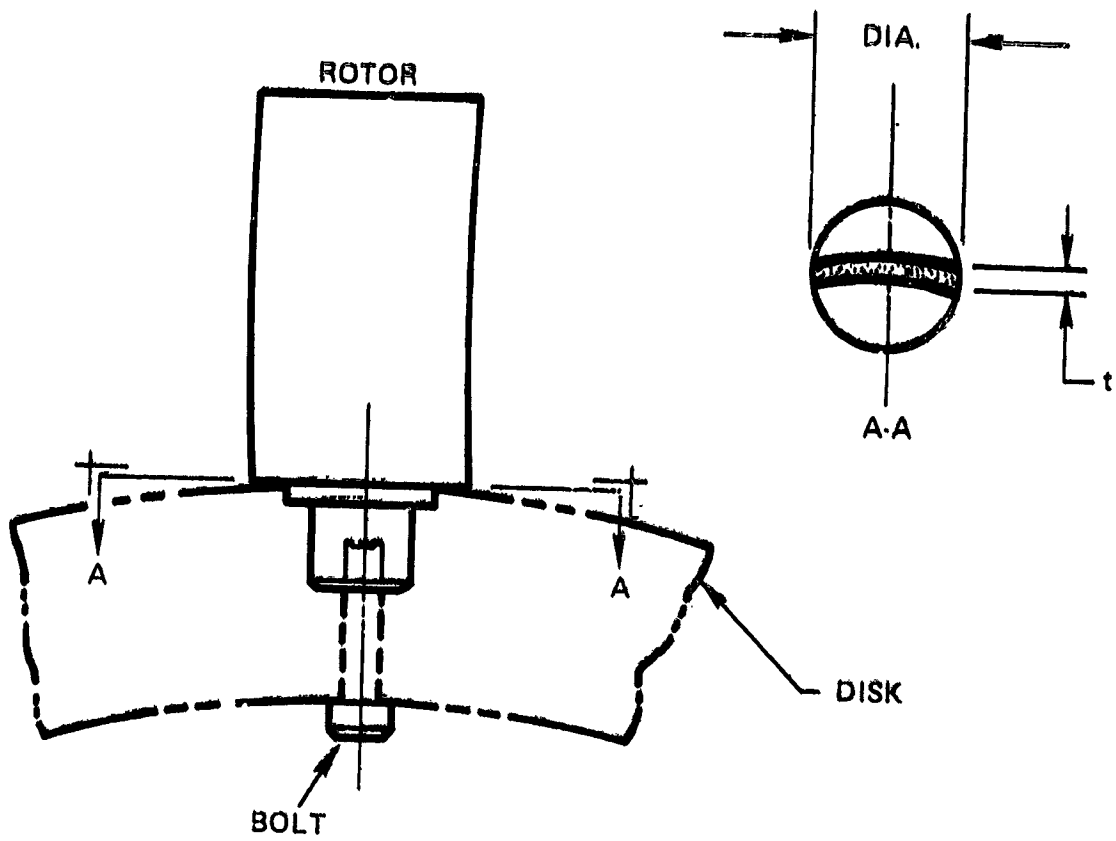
Schematic of Rotor Blade Attachment to Cylindrical Stub
